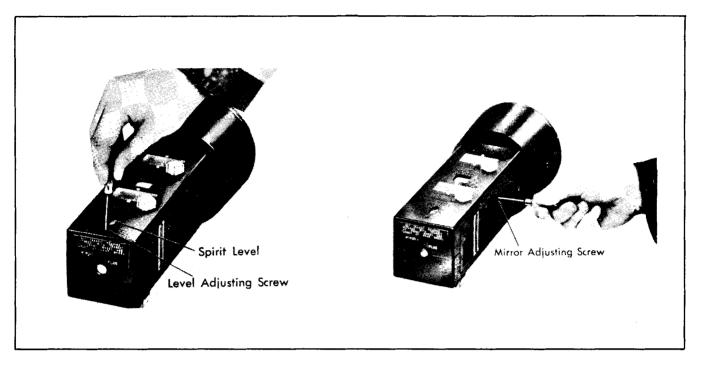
Adjusting Vertical and Horizontal Calibration
